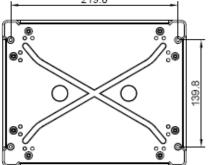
Single Horn Control Unit mounting Installation A131xxxxxG1
